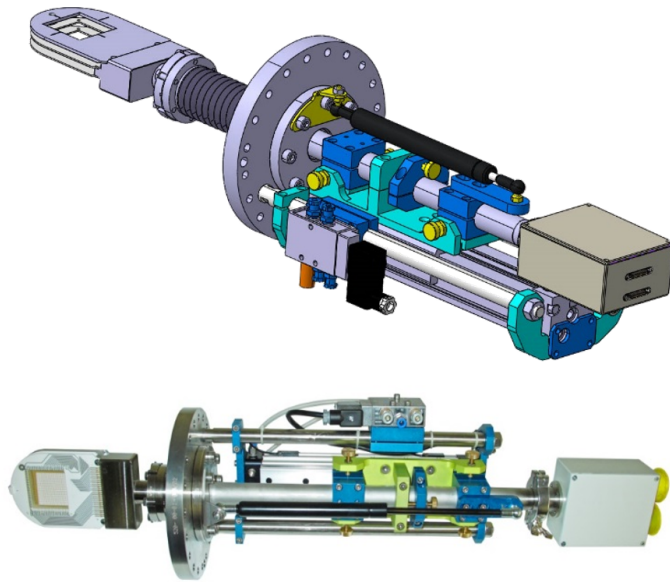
3D view (top) and picture (bottom) of the multi-wire profiler.
